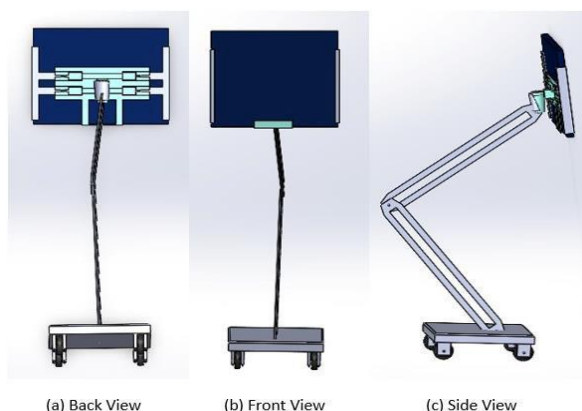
3D design using SOLIDWORKS: (a) backview, (b): Frontview, and (c): Sideview.
